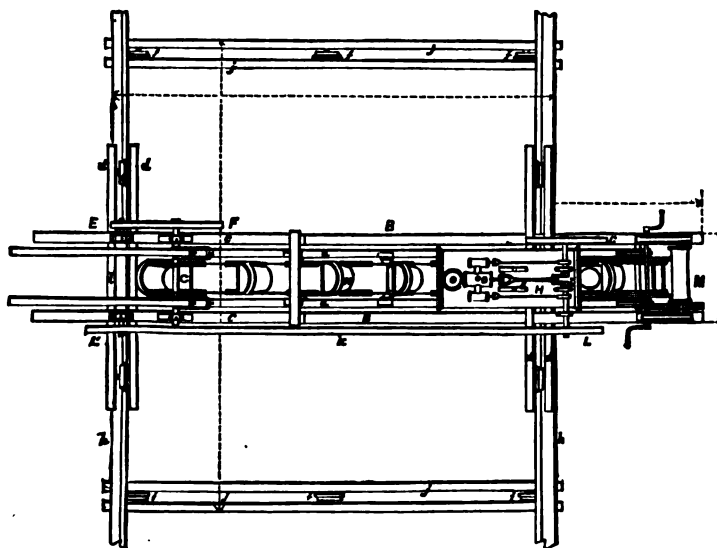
is a longitudinal section of this movable carriage-dredge when mounted and in working order; Fig. 2567 a plan; and Fig. 2568 a view of the end upon which the steam engine is placed. This dredging machine consists of a chain with buckets *a*, of which the axis of rotation *O* is mounted upon two parallel trestles *c*, fastened together upon two strong sleepers *B*, connected at each end by a series of transverse beams *d*, which constitute the rolling platform of the machine.
